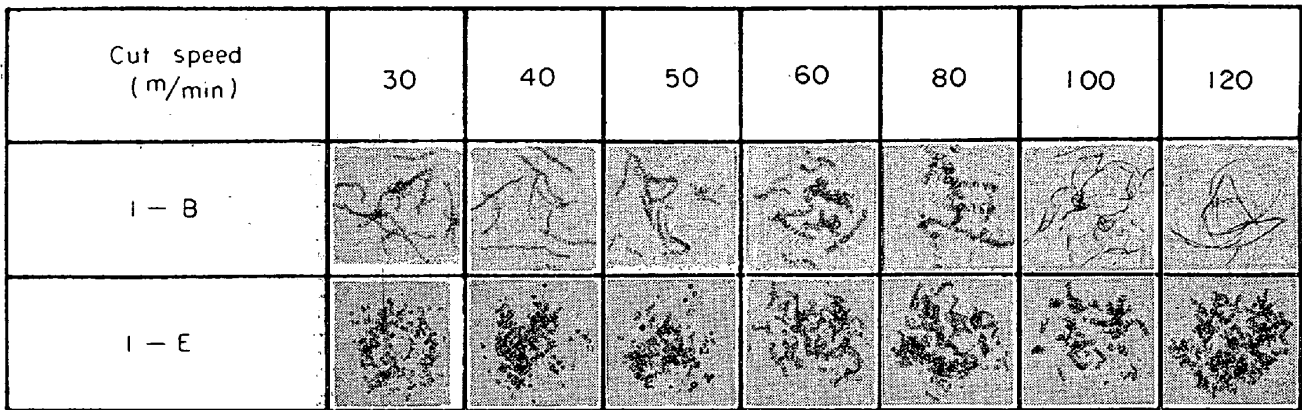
Photographs of chips in machining specimen No 1-B (0.010% S) and 1-E (0.075% S) by SKH4 tool. ($\times 1/4$)
